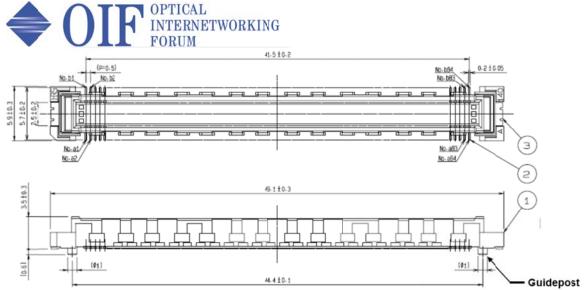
Hirose FX10A-168P-SV(83) Header Connector Assembly
